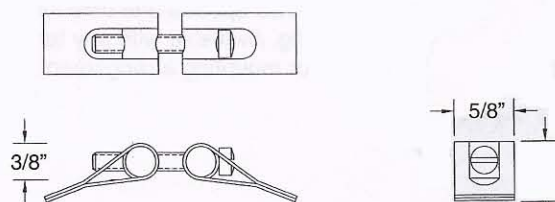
Standard Profile Barrel Nut Assembly Welded to Sheath with 10-32 Screw
